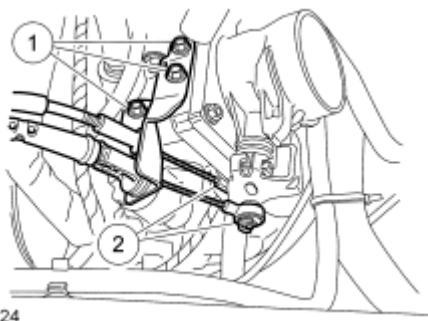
Identifying Accelerator Cable Bracket Bolts, Accelerator And Speed Control Cable
